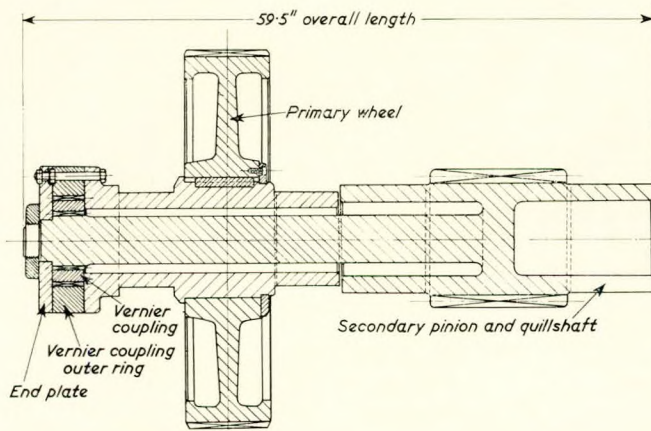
Y.E.A.D.1 gearing—Assembly of primary wheel and secondary pinion
